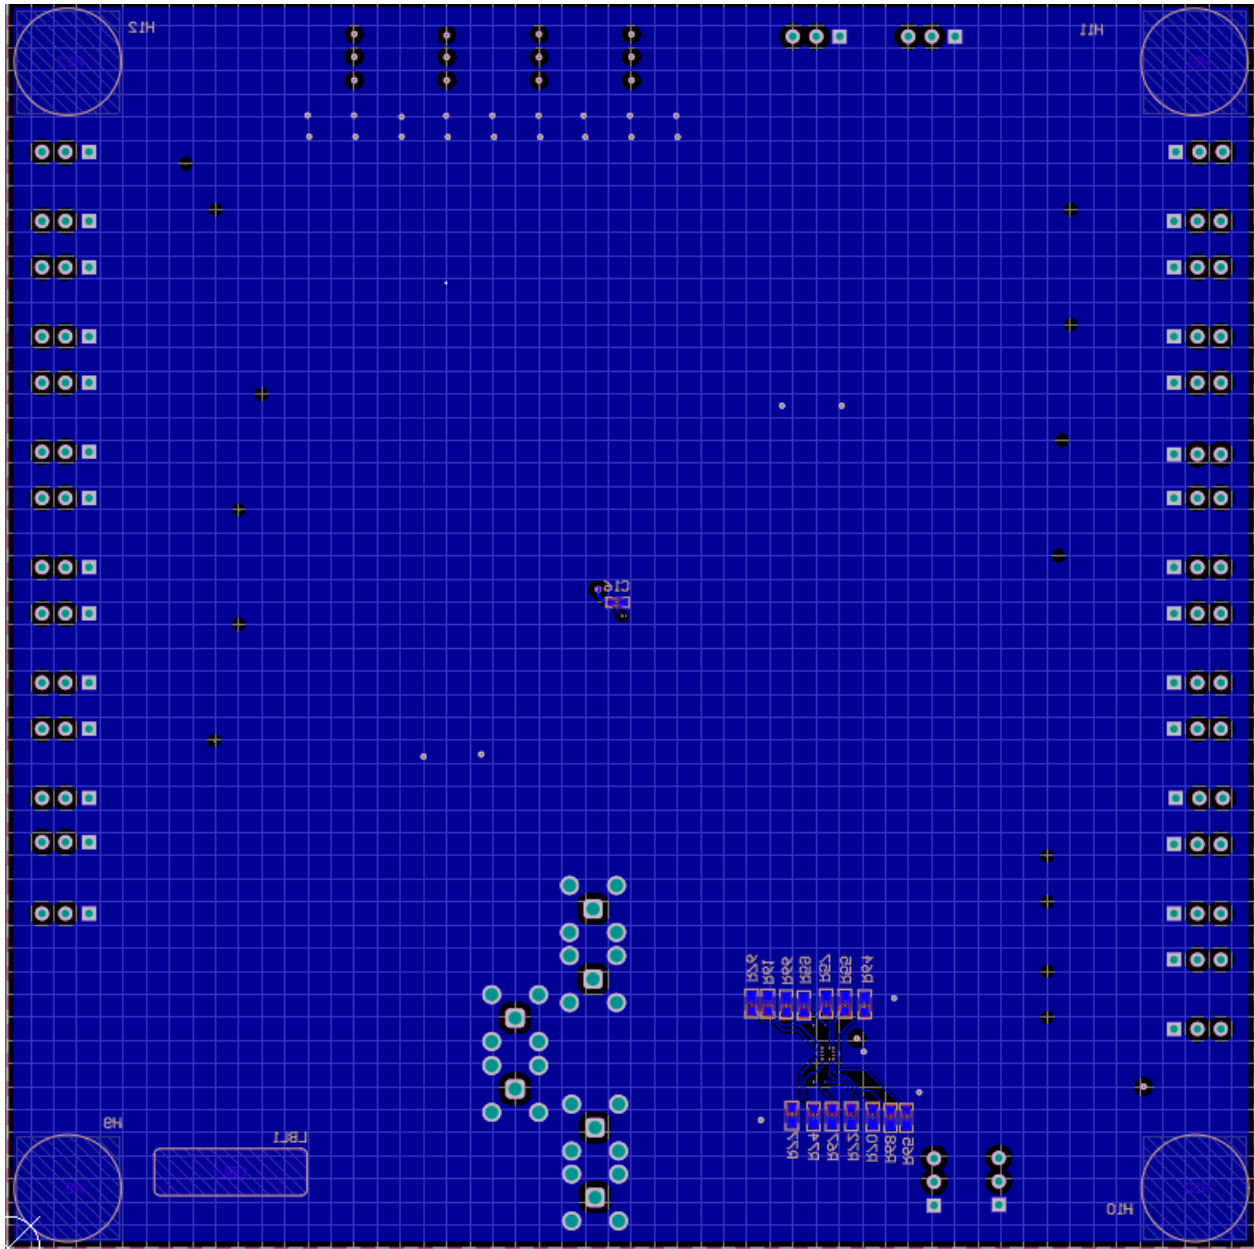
Bottom Layer Illustration of the TMUX646EVM Layout
